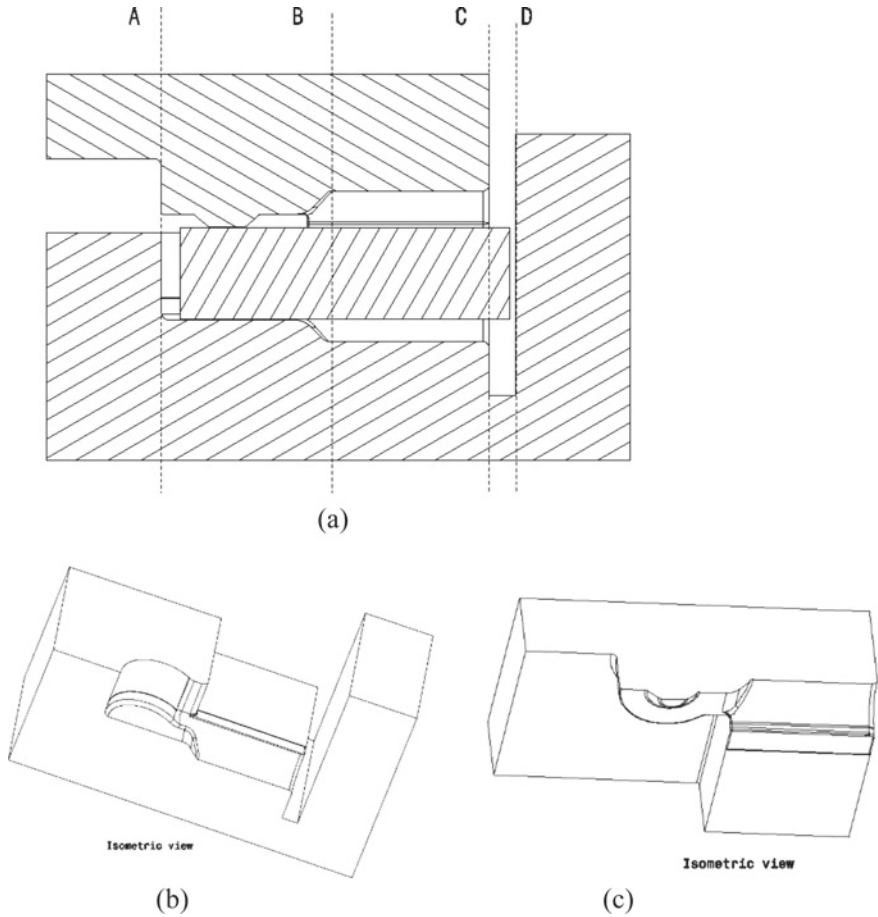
a Cross section of bottom die, upper die, and billet initial situation, in flashless forging of Tongue, b bottom die cross section, in 3D view, c top die cross section, in 3D view
